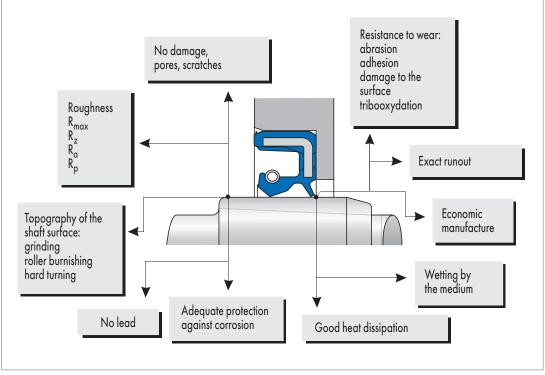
Requirements on the shaft design as a counter surface for Simmerrings
